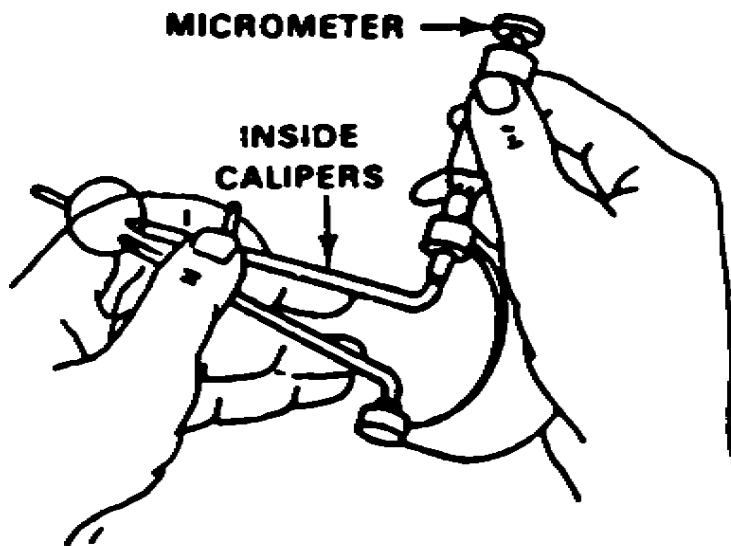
TRANSFERRING DIMENSIONS TO A MICROMETER
